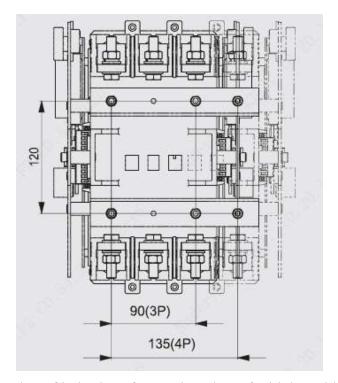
Drawing of hole size of mounting plate of withdrawable rear socket Note: Unmarked tolerance level should follow GB/T 1804-c.
